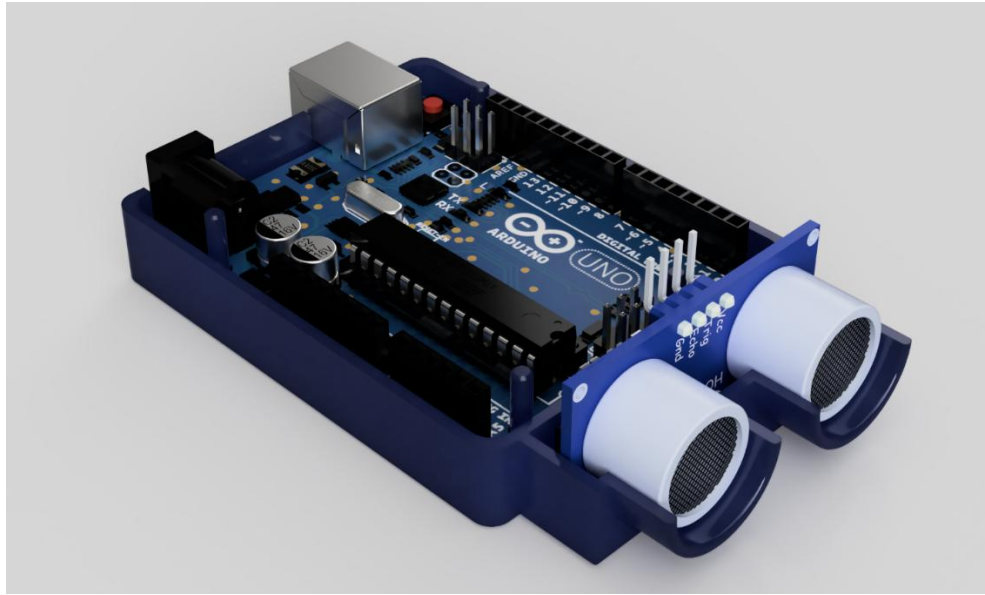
Enclosure design 1 ~ Appearance without cover - Blue
